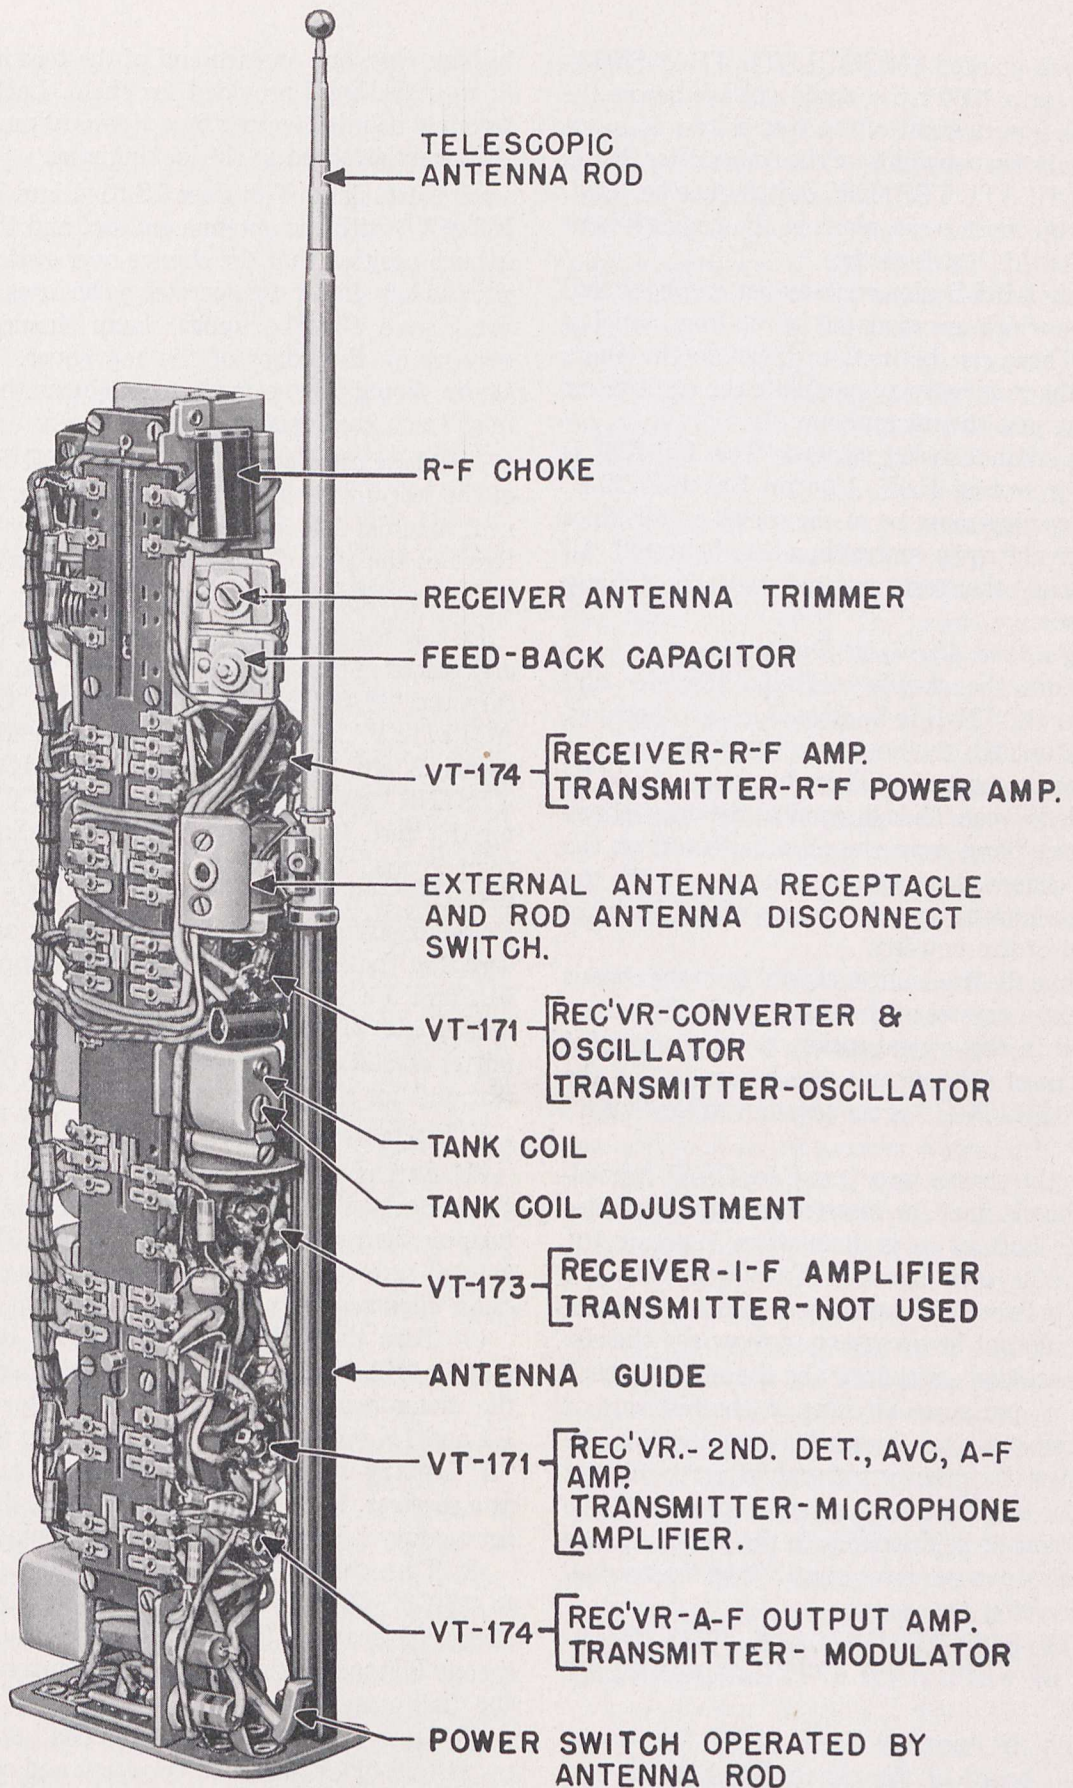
RADIO RECEIVER AND TRANSMITTER BC-721-B, CHASSIS (BOTTOM VIEW)
